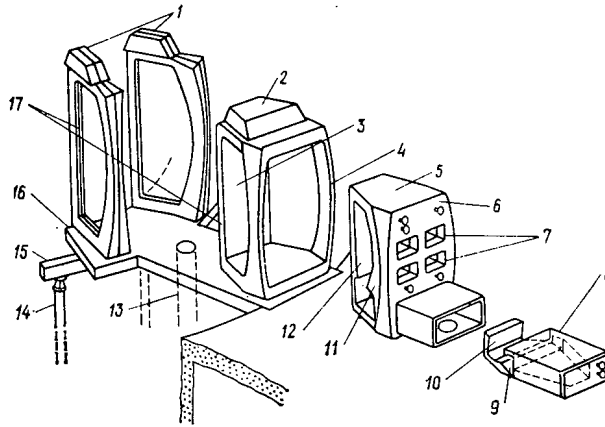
Component parts of an INTOR sector: 1) torus supports; 2, 3) semifixed torus sector and inner shield; 4) vacuum seal; 5, 6) interchangeable torus sector and outer shield; 7) test modules; 8) divertor module; 9, 10) outer and inner collector plates; 11) blanket; 12) interchangeable outer shield; 13) pump-out piping; 14) inner support column; 15, 16) beam and lower support of torus; 17) sealed surface of supports in sector.
